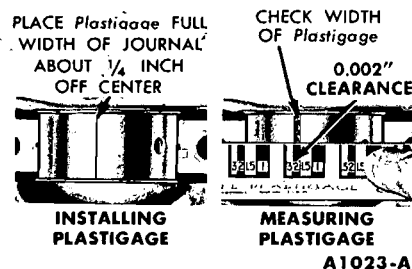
Installing and Measuring Plastigage—Engine on Work Stand
